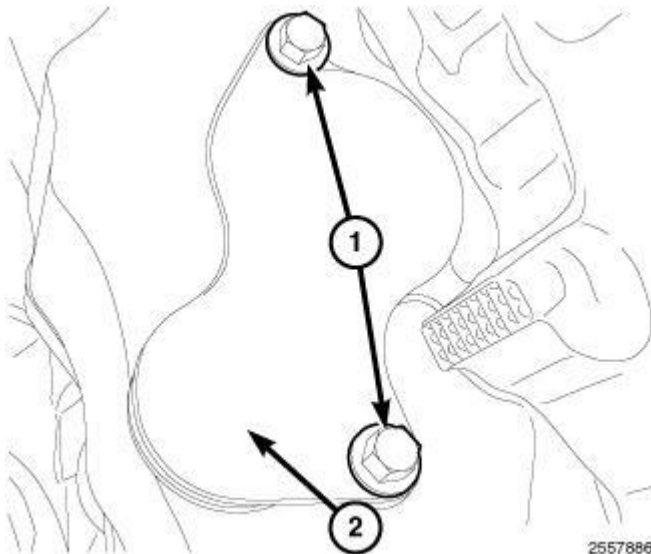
Identifying Bolts & Bell Housing Access Cover
